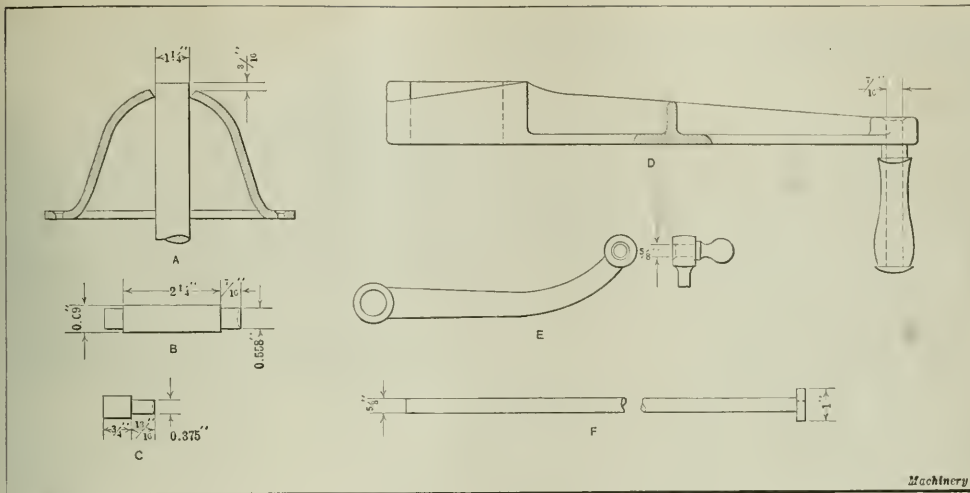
(A) Shaft and Hub Cap before riveting; (B) Pin used in Differential Gear-case; (C) Wire Wheel Hub Flange Pin; (D) Automobile Crank-handle; (E) Pitman Arm; (F) Drill Rod with Cold-rolled Steel Head
